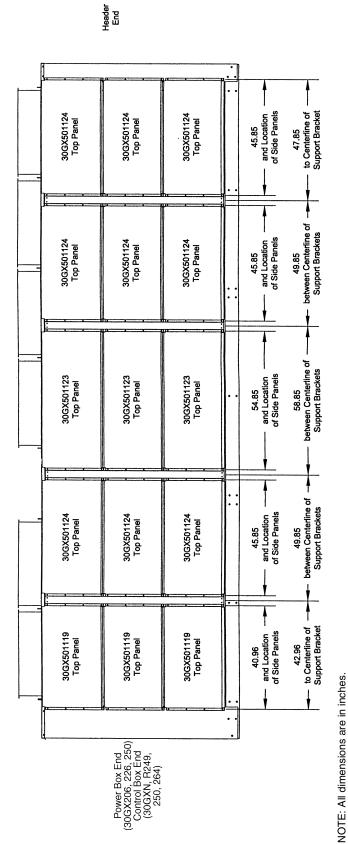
H — Unit Assembly, 30GX206, 226, 250 Cooler Side Only, 30GXN,R249, 250, 264 Both Sides
